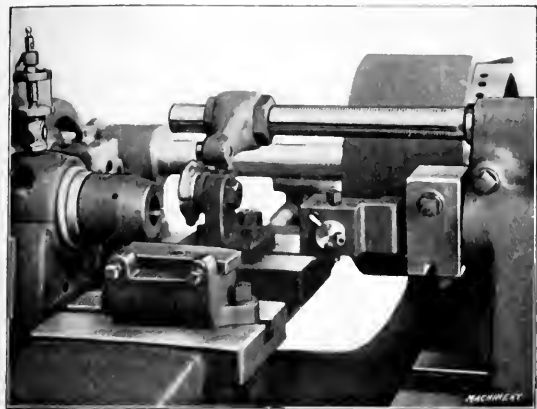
Illustration showing Application of Taper Turning Tool presented in Fig. 13
